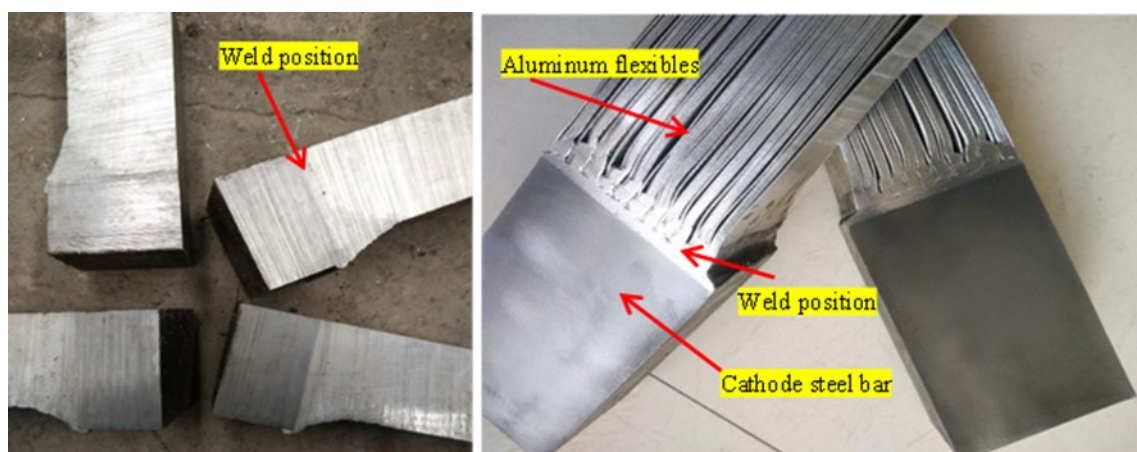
Left: Inspection of anode steel-aluminium welding section. Right: Inspection of cathode steel-aluminium welding section.
